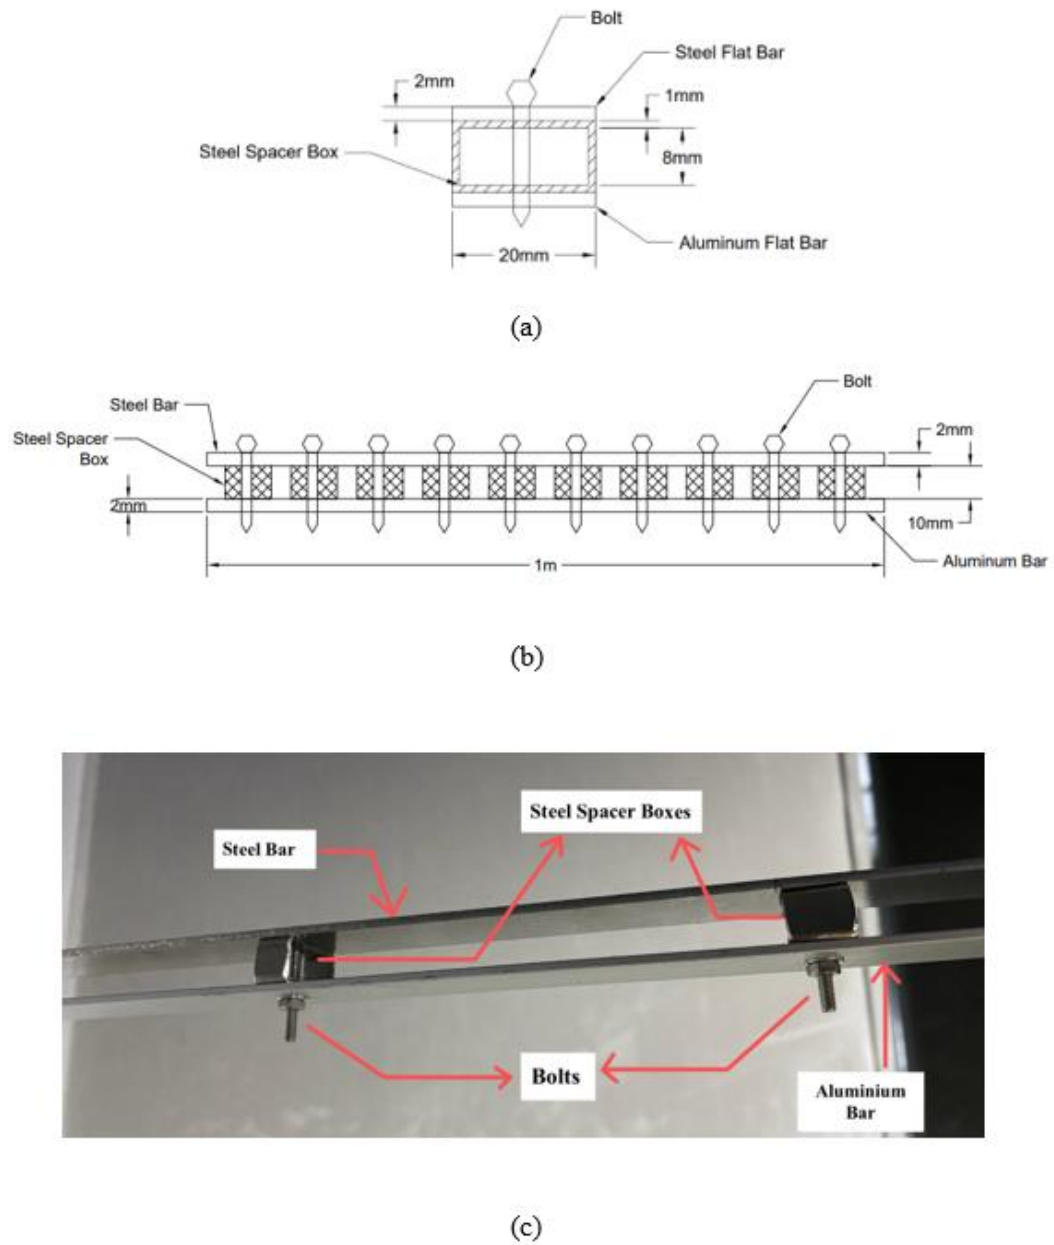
(a) Cross section and (b) side view details of the (c) composite steel aluminium beam.
